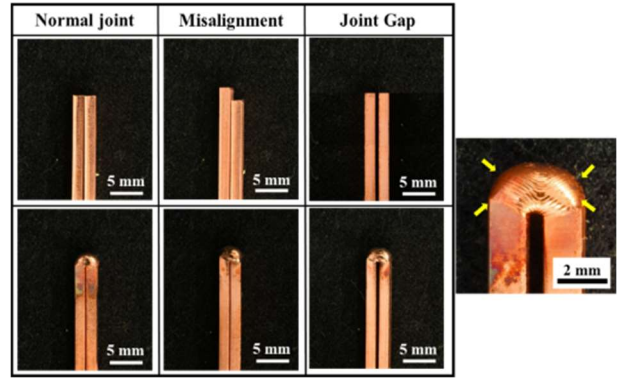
Joining results of rectangular copper wire by PJT welding process.
